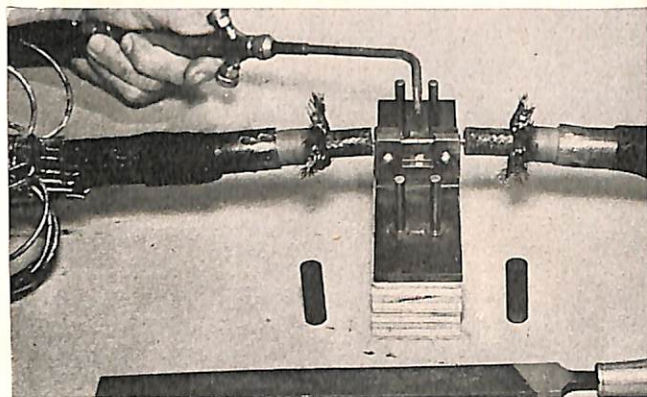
Splice holder in position ready for silver-soldering the inner conductor. Note that the jig is also used to file a square surface on the ends of the conductor.
